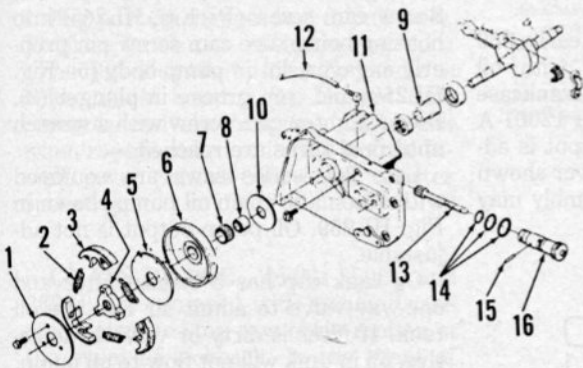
Exploded view of oil pump assembly used on later 360 series and clutch used on some later 360 models.
